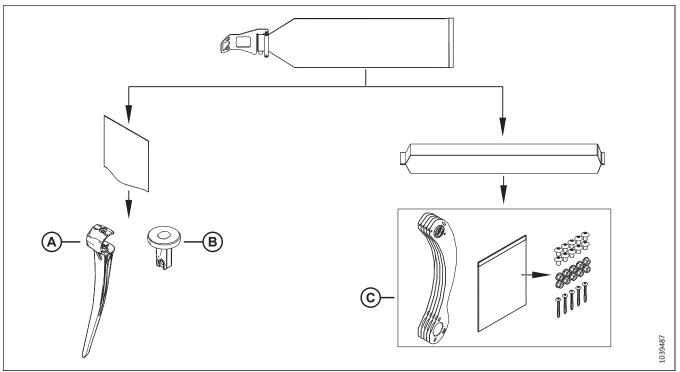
Reel Endshield Parts Bag MD #340985 - MD #340986 is Similar
